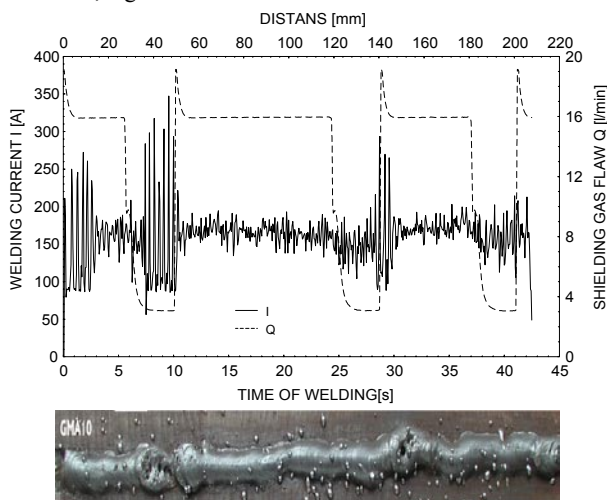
Instant value of welding current and welding voltage during GMA welding. Lack of gas shield as a disturbance of the welding process is seen in the plots and the weld
